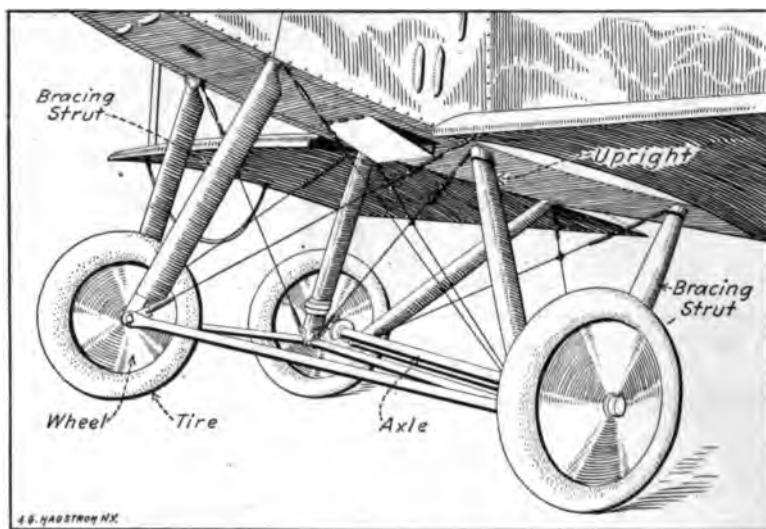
Airplane Landing Gear of Three Wheel Type Showing Main Components.
